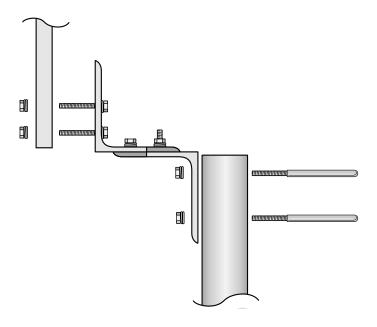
Antenna Mounting Hardware, Exploded View
